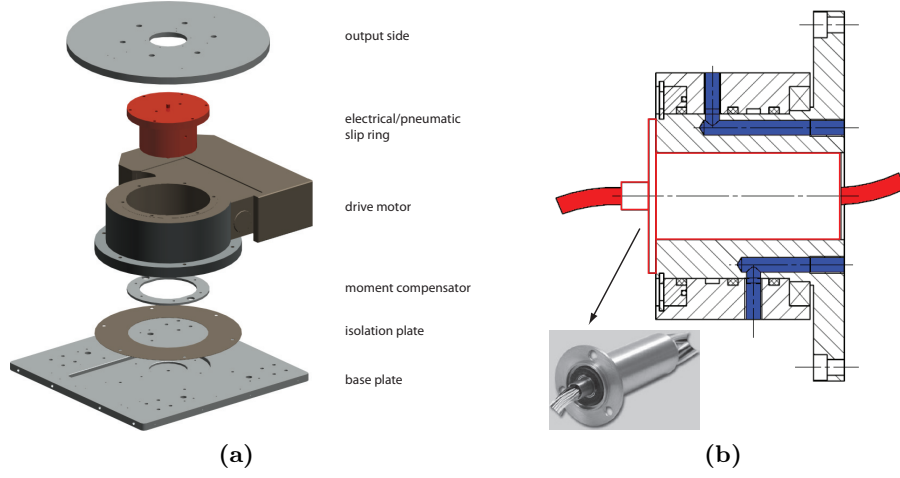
Exploded view of the 4 DOF base unit (a) and the pneumatic and electrical multi-channel feedthrough (b).
